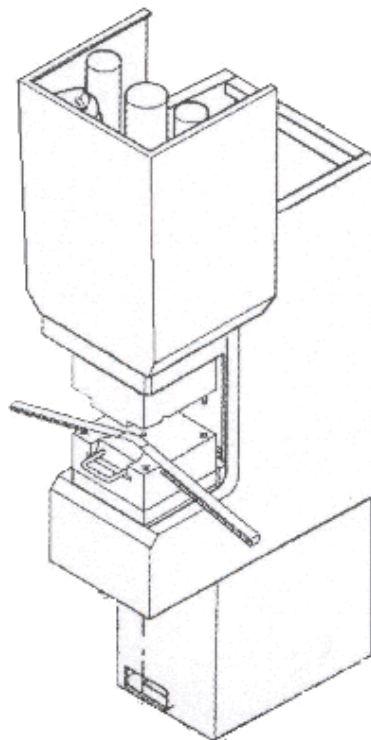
Example of an injection assembling machine, shown without protective devices for the mould area
